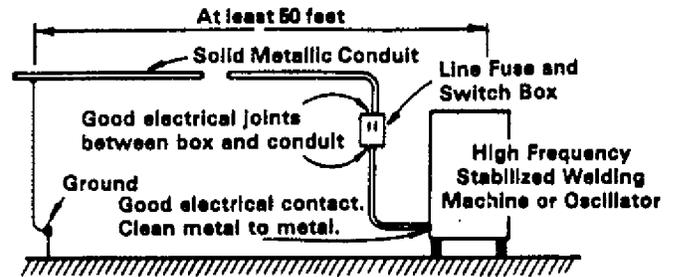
Power Service Installation H.F. Stabilized Arc Welding Machine
